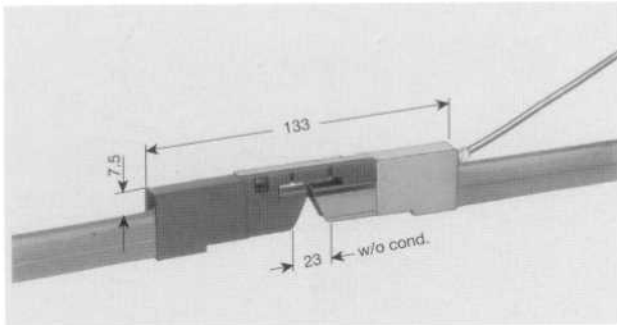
Isolating assembly LT/LTE-U 10 with feed on one side
